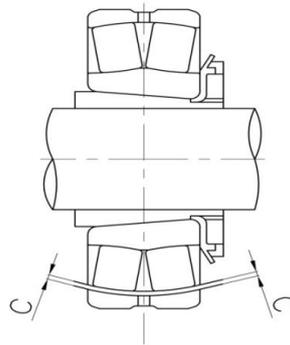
Clearance Measurement of Spherical Roller Bearing
